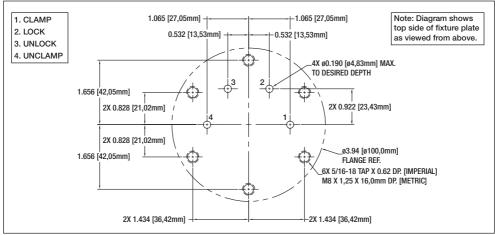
, Mounting Dimensions, Models MPFL-100V, MPFN-100V, MPFR-100V, WPFL-100V, WPFN-100V
